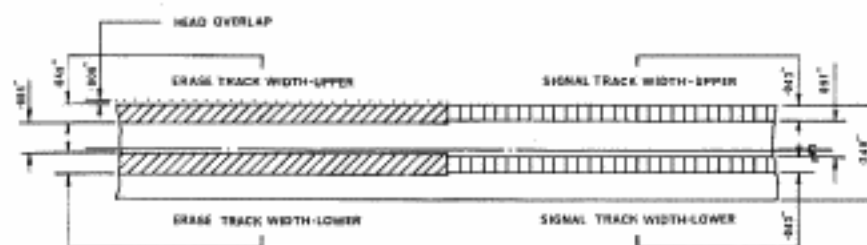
STEREO TRACK DIMENSIONS MODELS 704 AND 724
